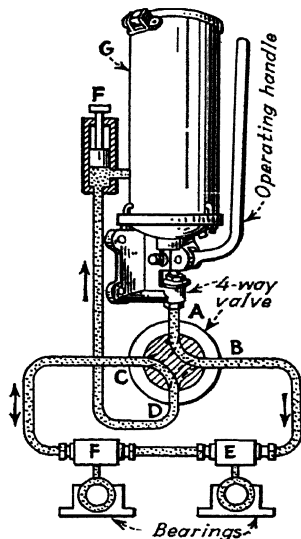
Manually operated pump, four-way reversible valve and two feeder valves for a single-line system. (Courtesy Trabon Engineering Corp.)
